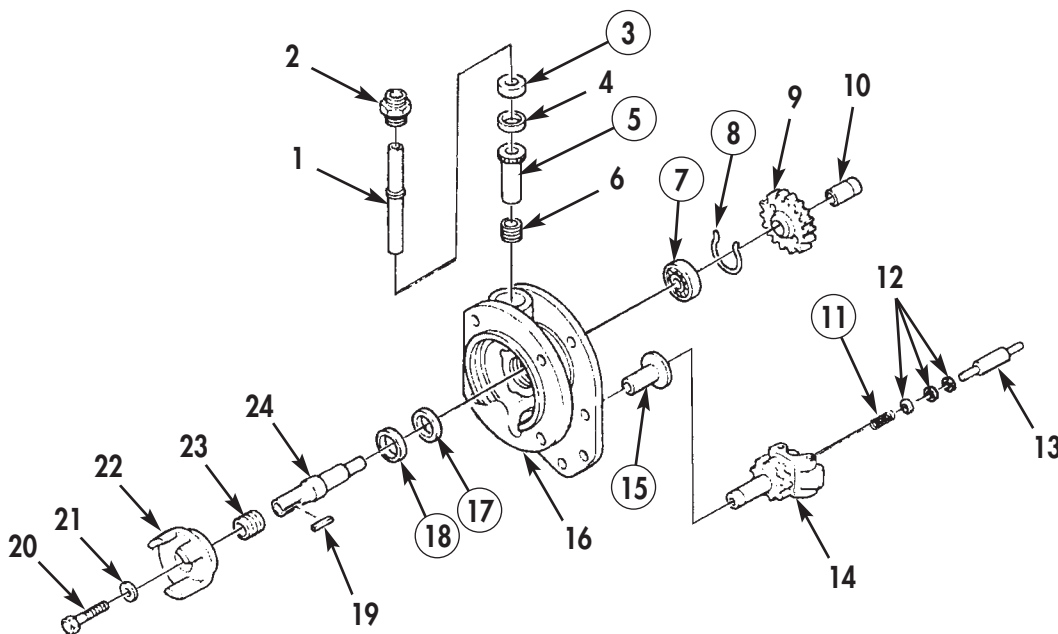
Fuel Pump Front Cover and Governor Assembly.
